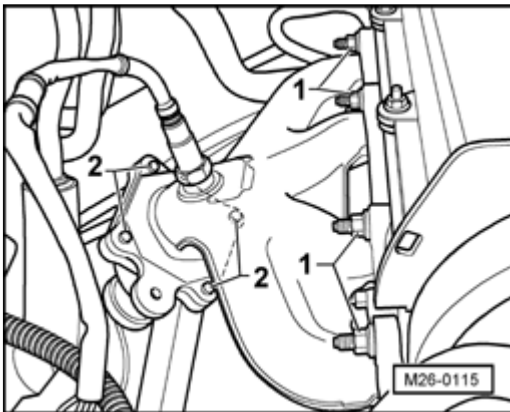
Exhaust Pipe Securing Bolts & Nuts
